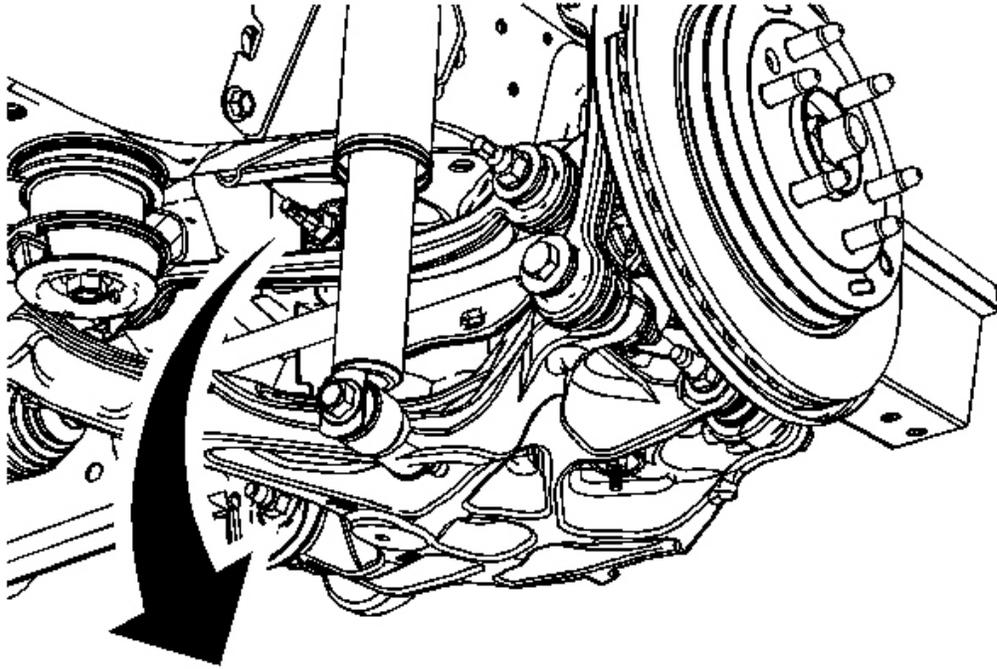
Identifying Rear Upper Adjuster Cam & Cam Bolt
